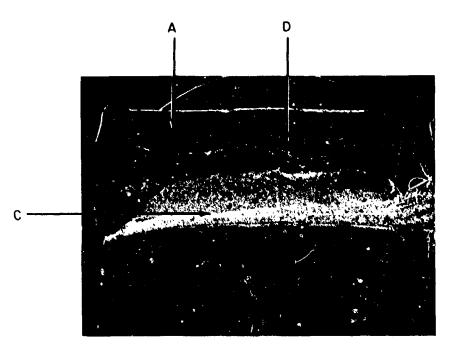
Tensile fracture surface of an A-514 weldment containing LOP, 8x.
